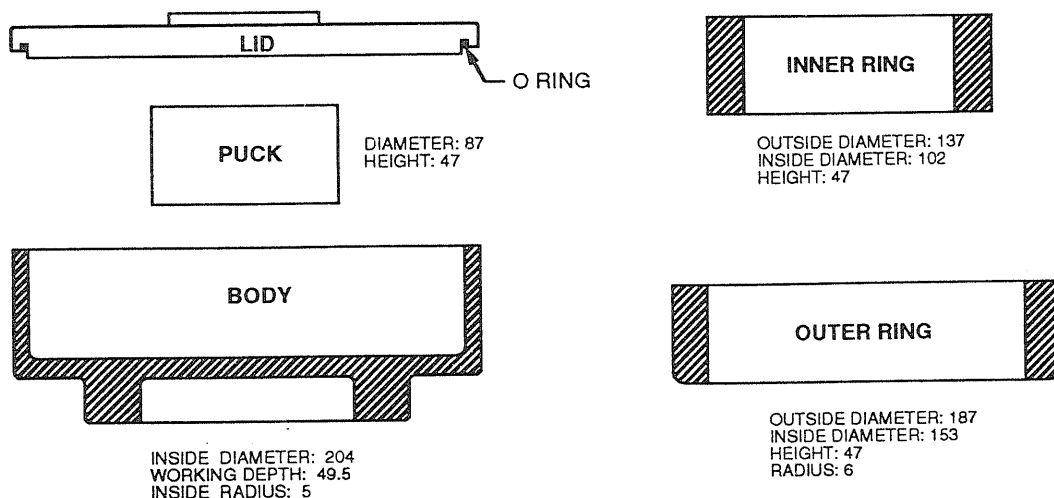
The K1045 Swing Mill. Dimensions in mm.
